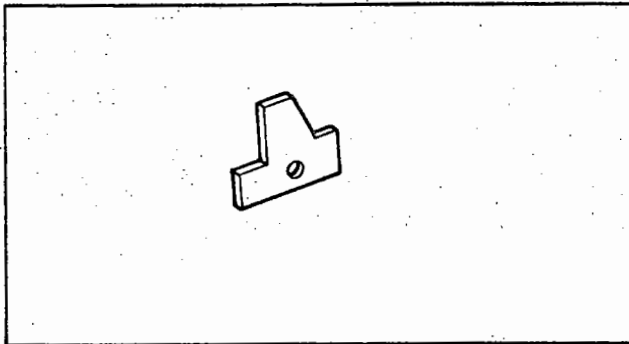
T25939 Enrichment Valve Screw Adjusting Assembly Gage
